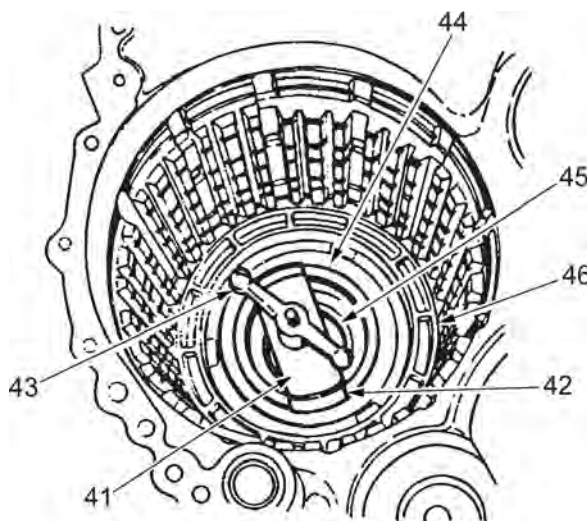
Bar and Stud Assembly and Compressor Installed for Retaining Ring Removal.
